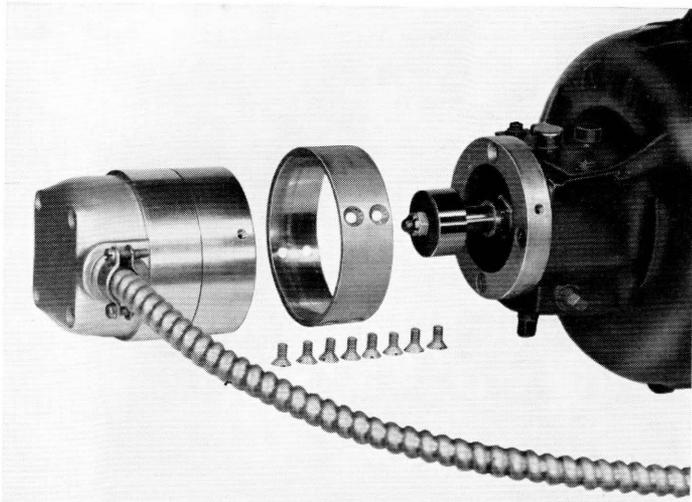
Exploded view of ring and sleeve mounting for Weston Model 758 Type HF Bearingless Tachometer.
